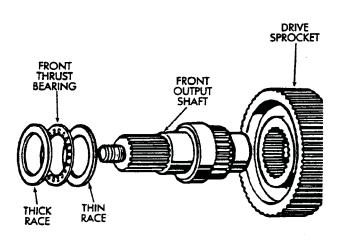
Install Output Shaft Front Thrust Bearing And Races
